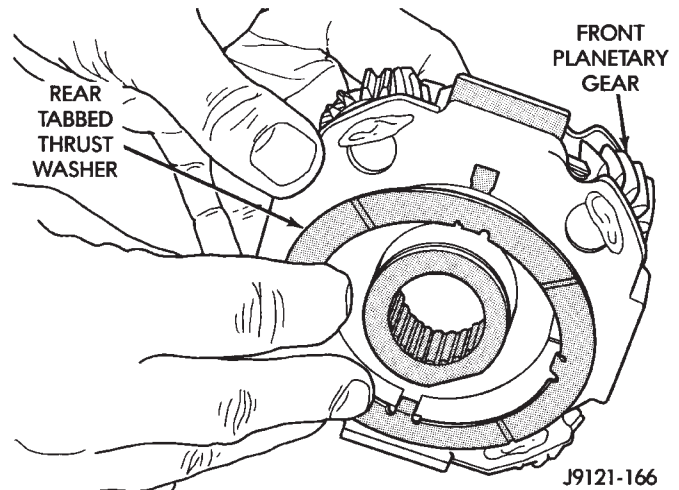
Installing Rear Thrust Washer On Front Planetary Gear
